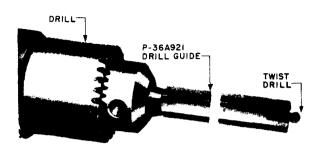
Mounting Drill Guide and Drill for Removing Rivets
